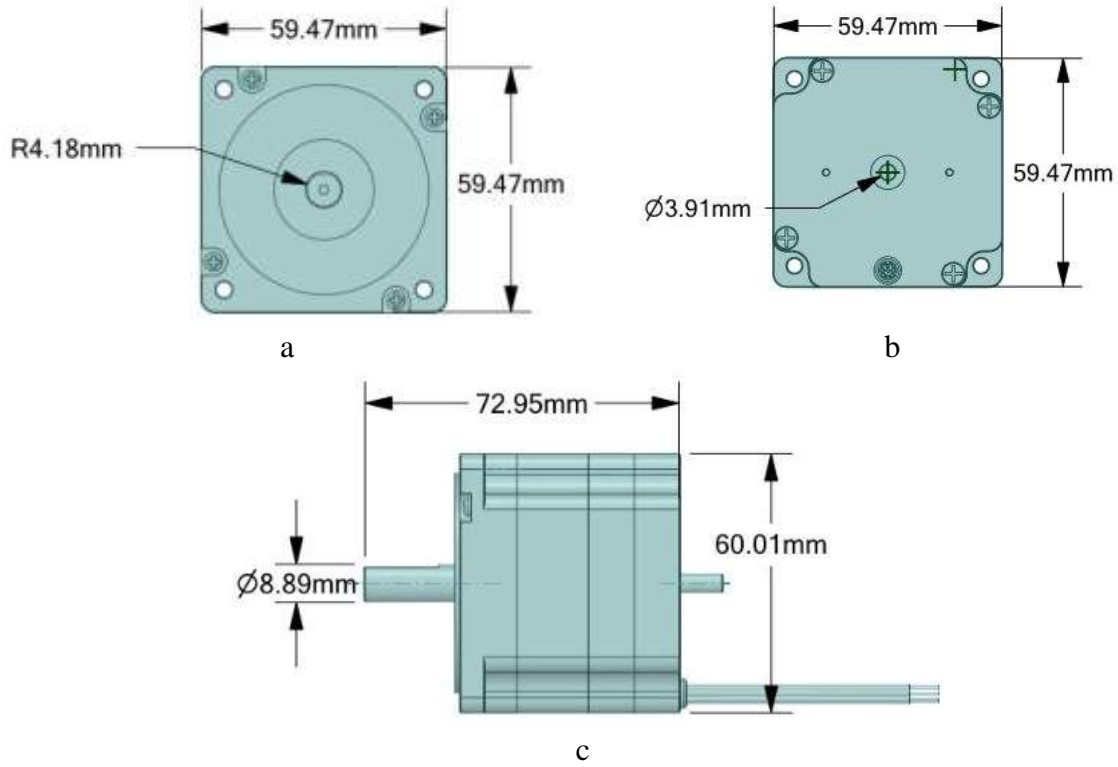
Dimensions of the employed generator, a) front, b) back, c) side views
